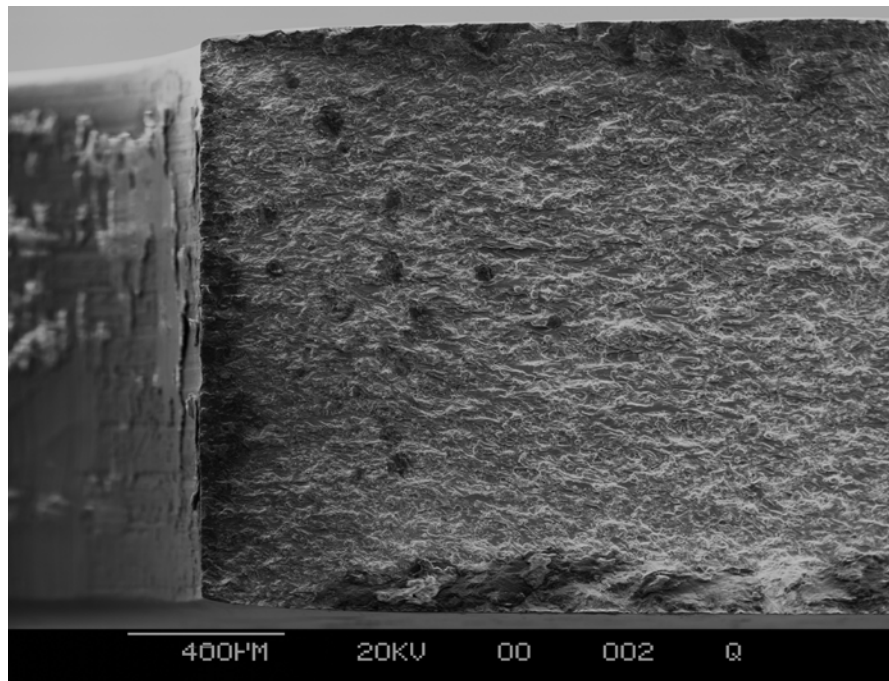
Fracture surface of specimen 11 showing crack initiation area
